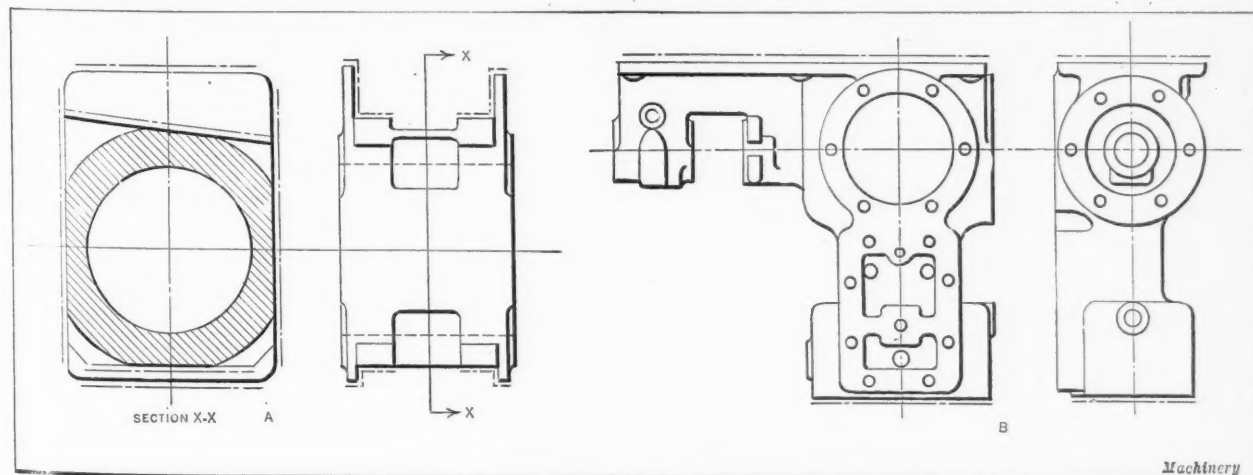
(A) Crank-head Box; (B) Compressor Frame
